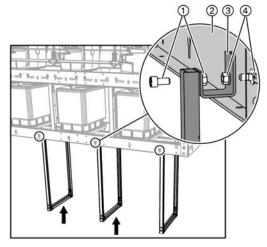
Square panel connection housing: Mounting the extended cable bracket (representation without 4MC4 current transformer)
